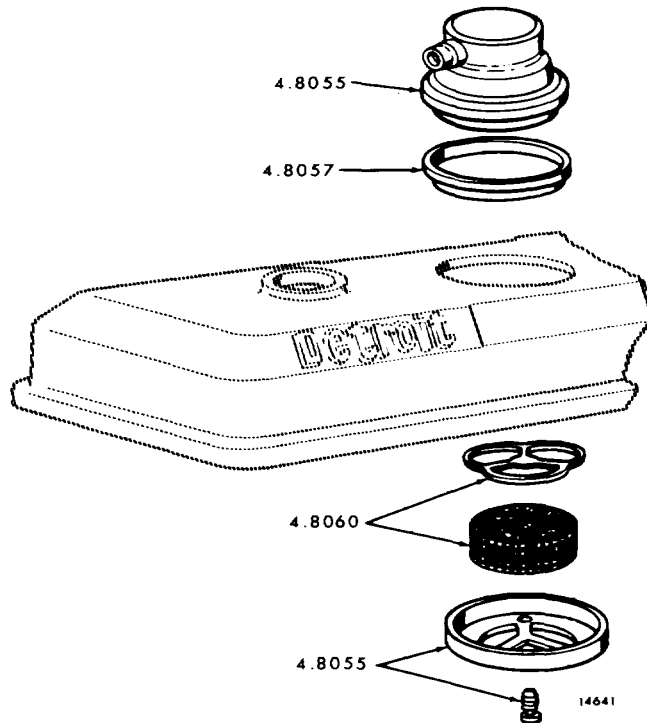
B BREATHER ASSEMBLY (Cast Cover)
